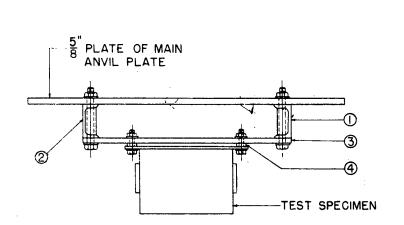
ANVIL PLATE OF SHOCK-TESTING MACHINE
